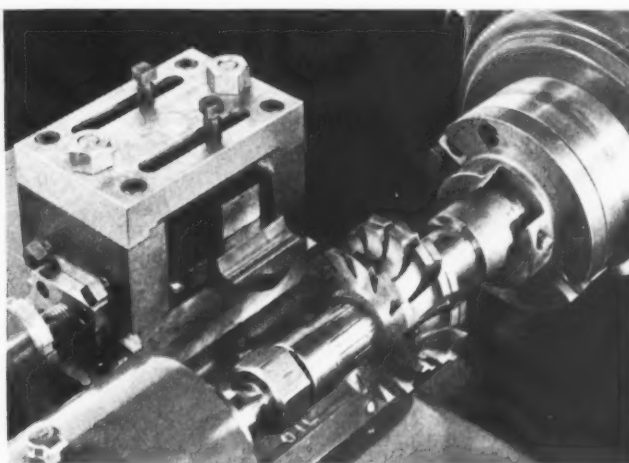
Set-up Employed for Relieving Special Form Cutter
